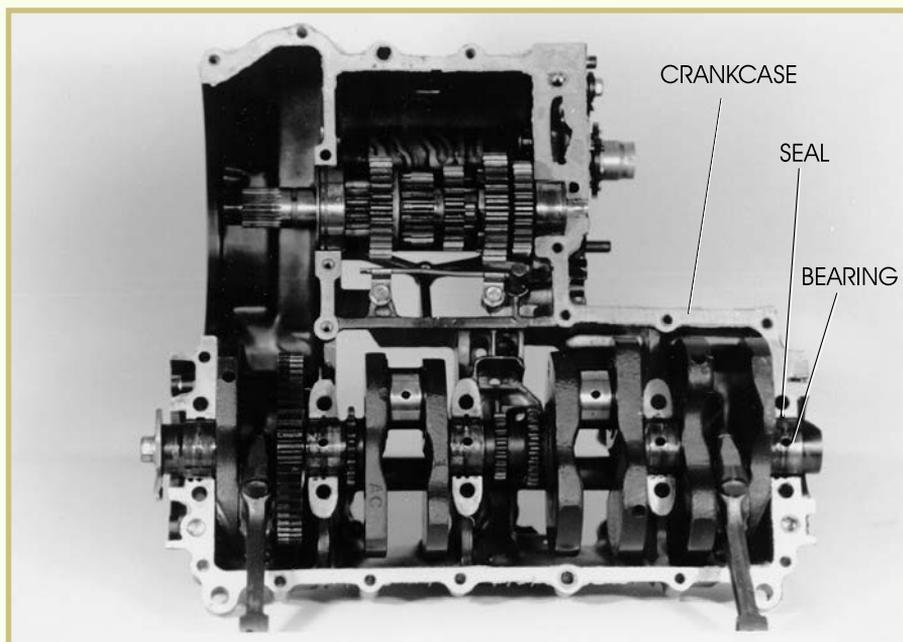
This illustration shows a one-piece four-stroke crankshaft.
